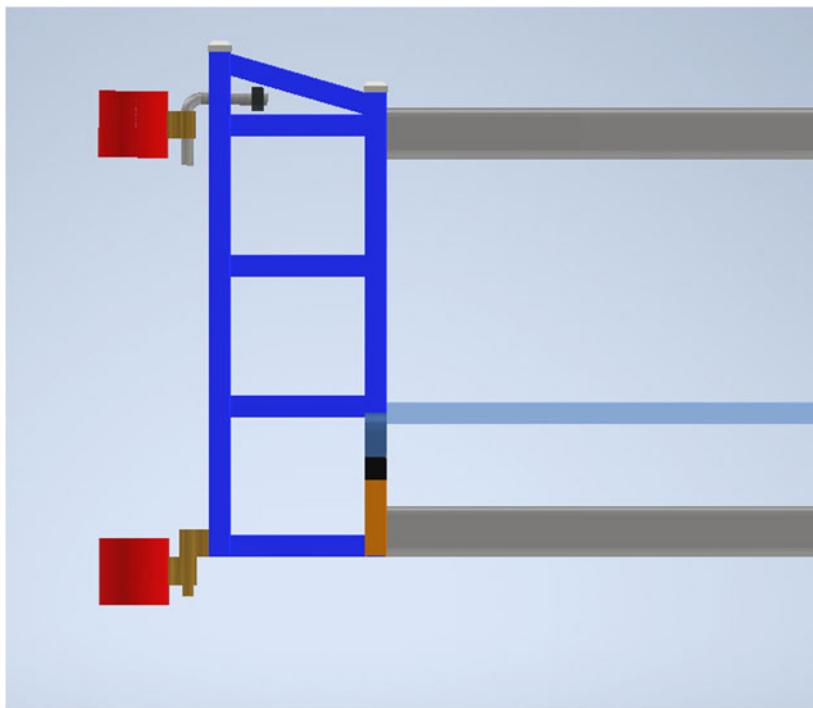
Prototype Design – Revised trough body lip, top view of revised lip size
